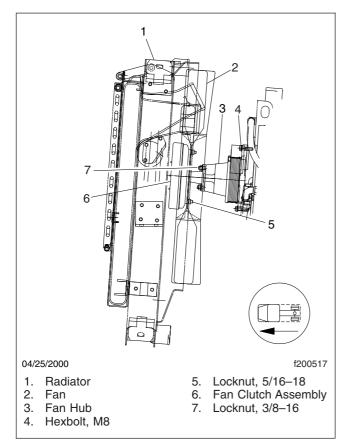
, Viscous Fan Clutch Mounting, Caterpillar 3126 Engine
